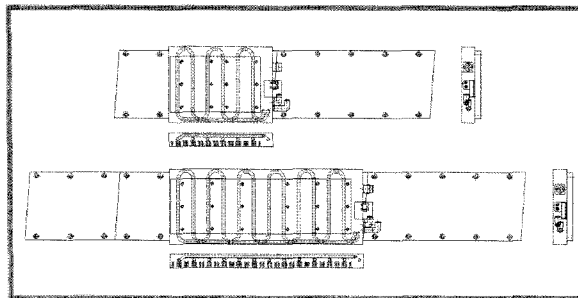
Linear motors (lower/upper : X-axis/Y-axis)
